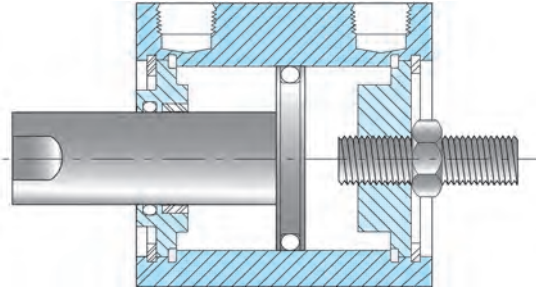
Cylinder body that includes mounting grooves and standard electronic switches.)
